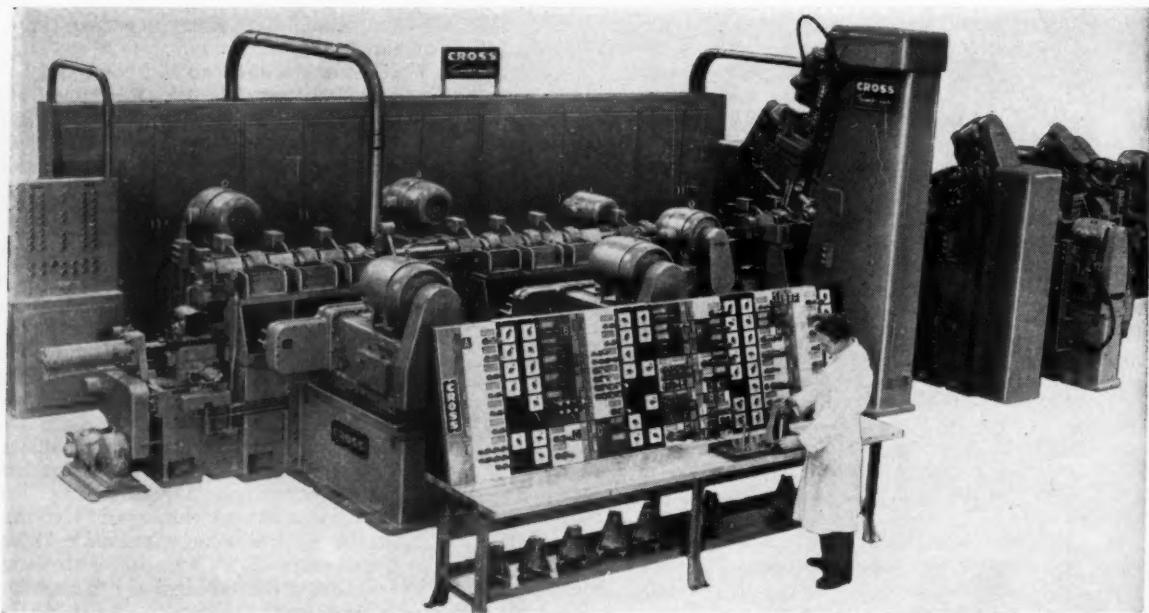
Cross tool control board for transfer machine shows, by tests, the safe number of parts each tool can produce
